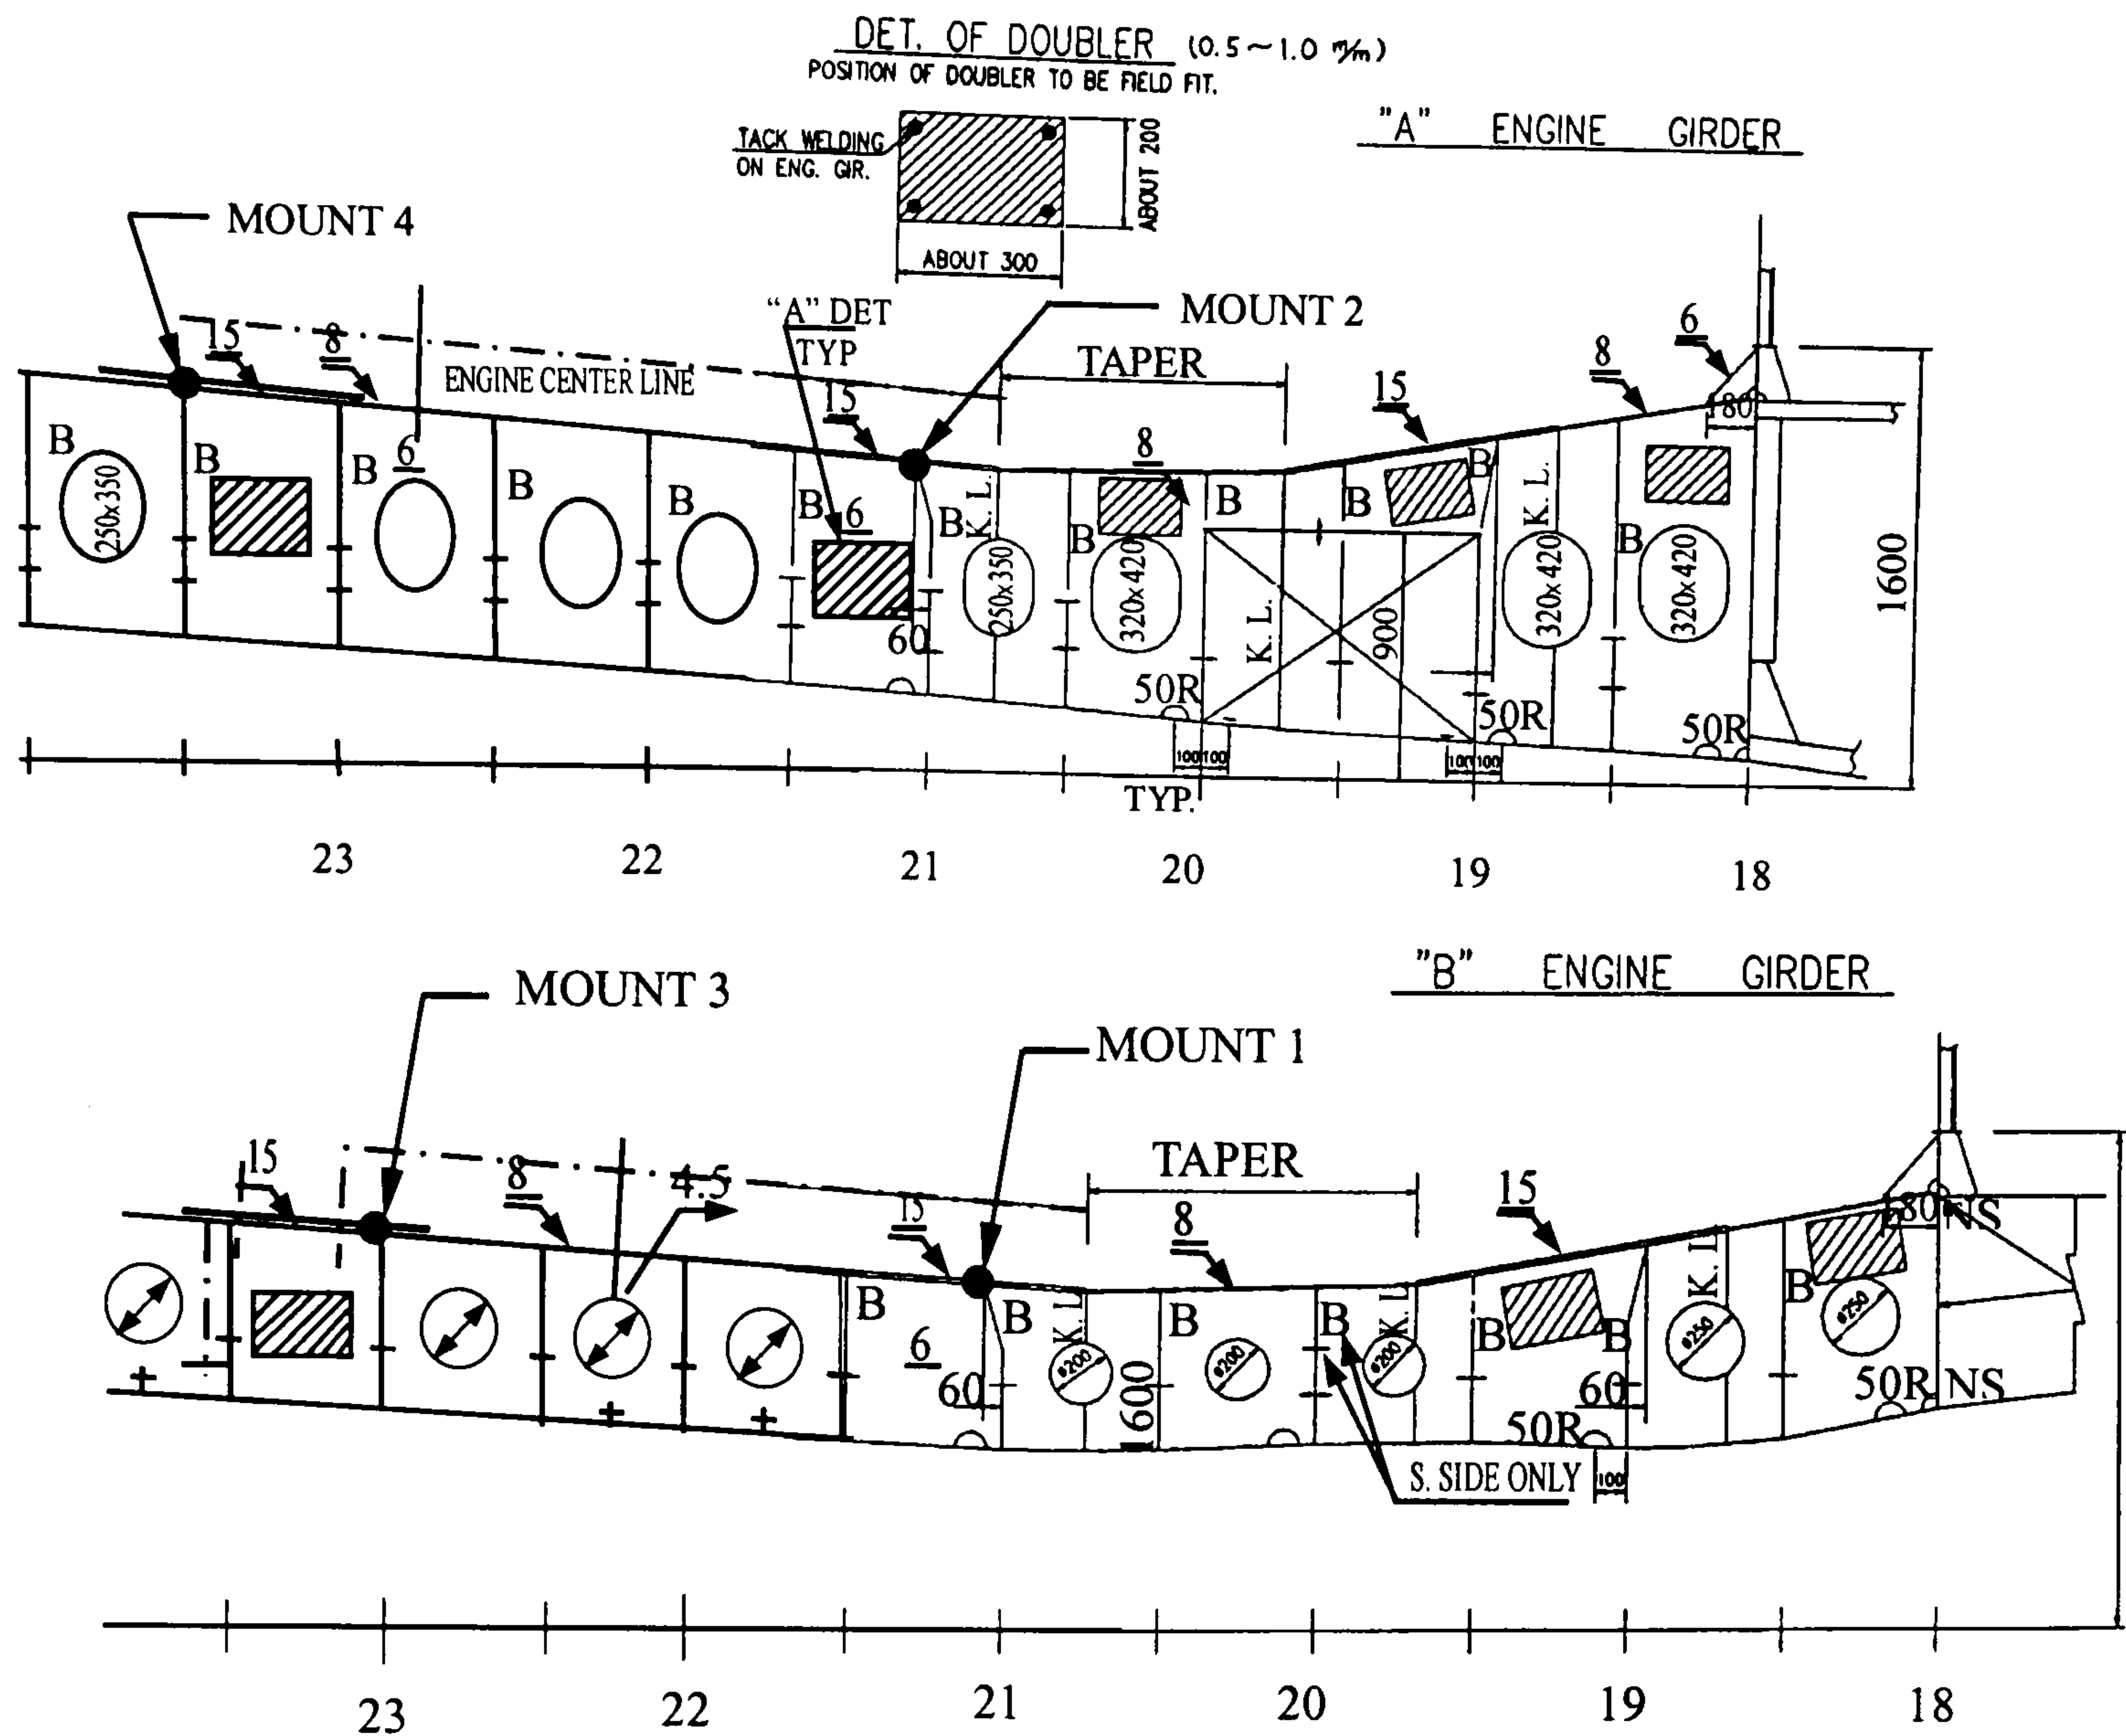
Locations of the spot welded squeeze plates to engine girders.
